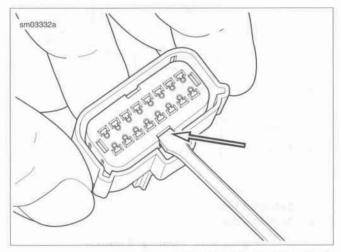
Secondary Lock Pry Slot (Socket Housing)
